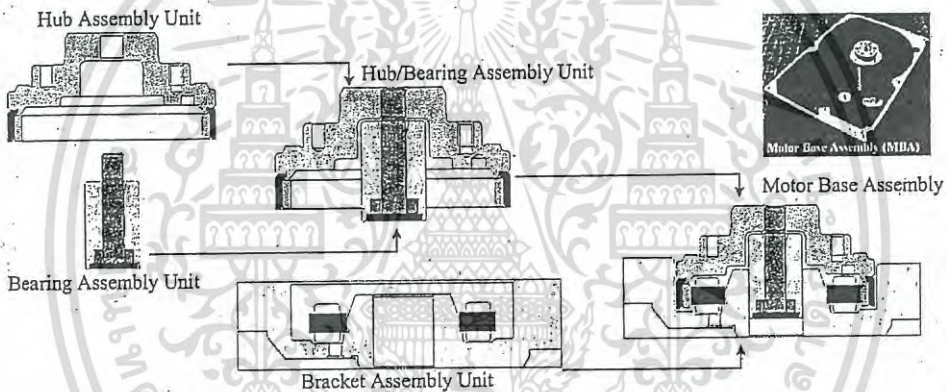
Schematic view of spindle motor hub assembly (or motor base assembly)
